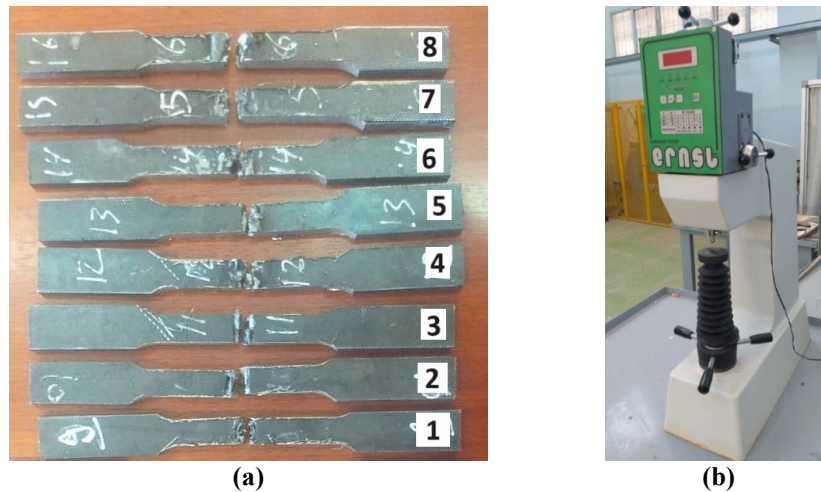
Welding testing (a) Tensile test samples; (b) Rockwell hardness instrument
